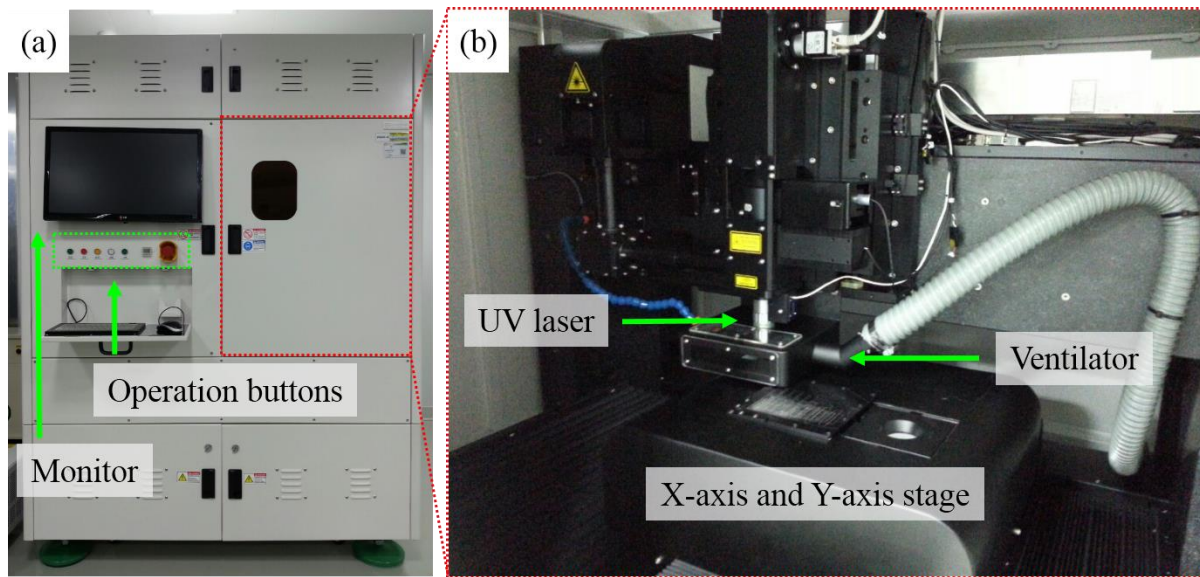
Mechanical structure of a UV laser micro machine. (a) Exterior of a UV laser micro machine. (b) Inside of a UV laser micro machine.
